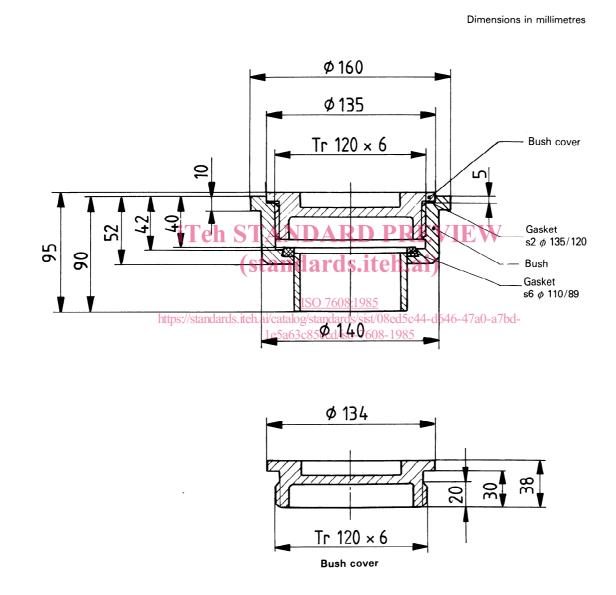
Bush DN 80 for the disposal of oily mixture, assembled with the cover
